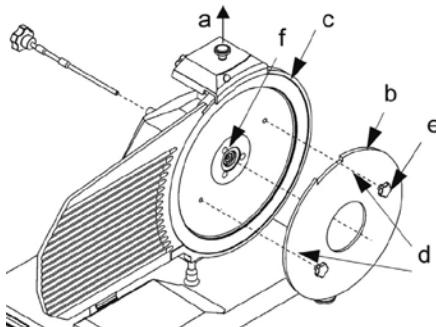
Assembling the Plexiglas blade removal tool (b)
